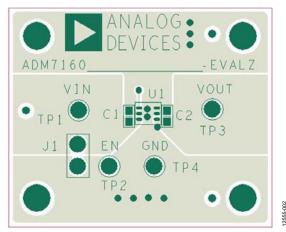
ADM7160CP-EVALZ (6-Lead LFCSP) PCB Layout
